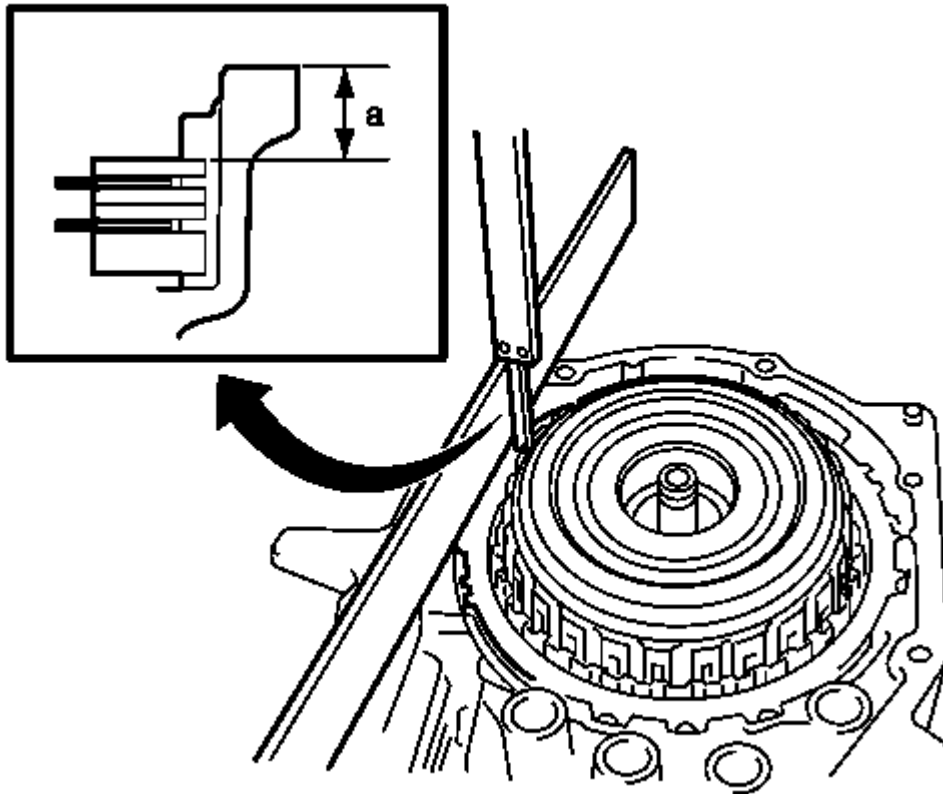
Measuring Distance (a) Between 2Nd Coast And O/D Brake Flange
